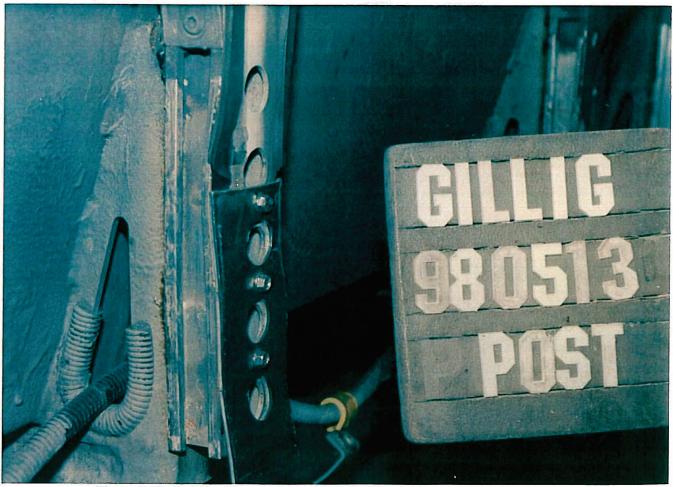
Post-Test Impact Area w/Exterior Panels Removed View 2
